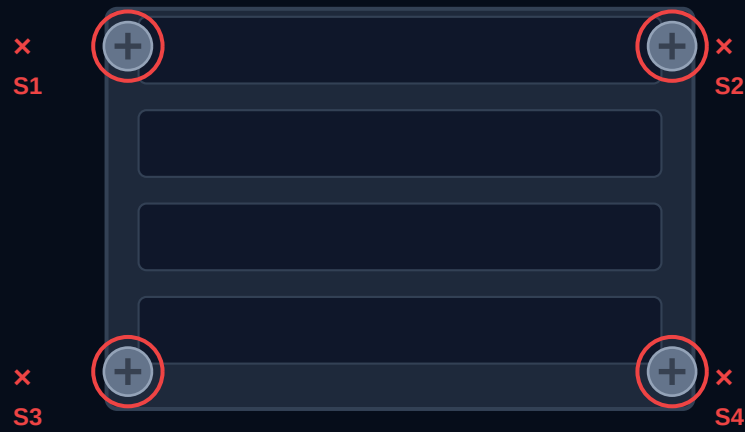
HDD cage — remove 4 corner screws (S1–S4)
